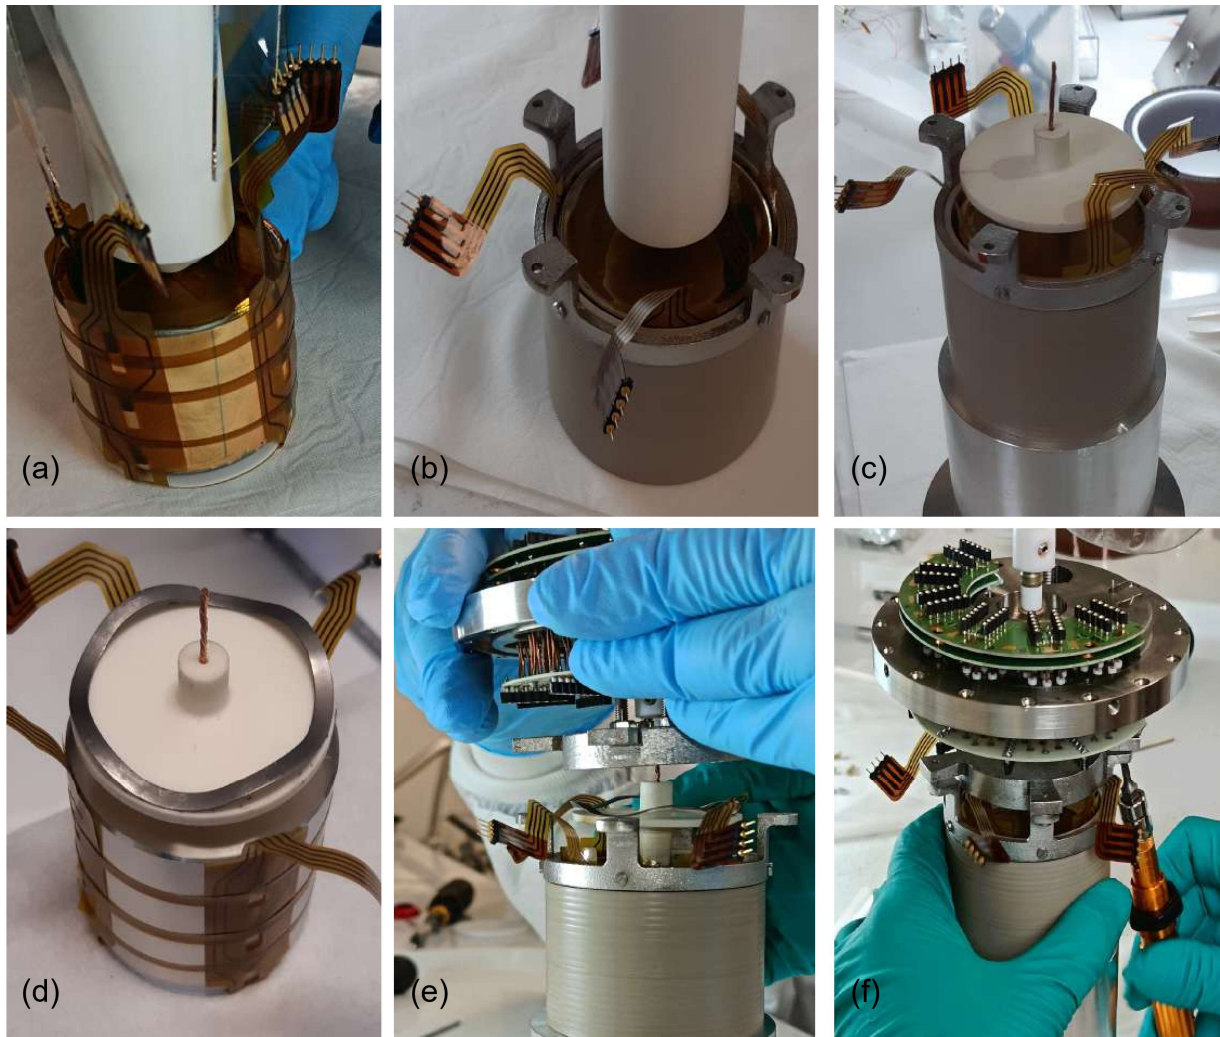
Step-by-step illustration of the detector assembly process. (a) The four arms of the flexible PCB are brought into contact with the lateral surface of the detector and secured using the three polyimide strips. The strips are carefully wrapped around the detector and fastened with polyimide tape. (b) The detector is then inserted into the PEEK case and the temporary holder is removed. (c) The alumina cone housing the high-voltage connector is inserted into the cavity. (d) The single-wave spring is positioned at the base of the cone. (e–f) The assembly is completed by positioning the spring holder and fastening it to the PEEK case using a torque screwdriver set to the calculated tightening torque.
